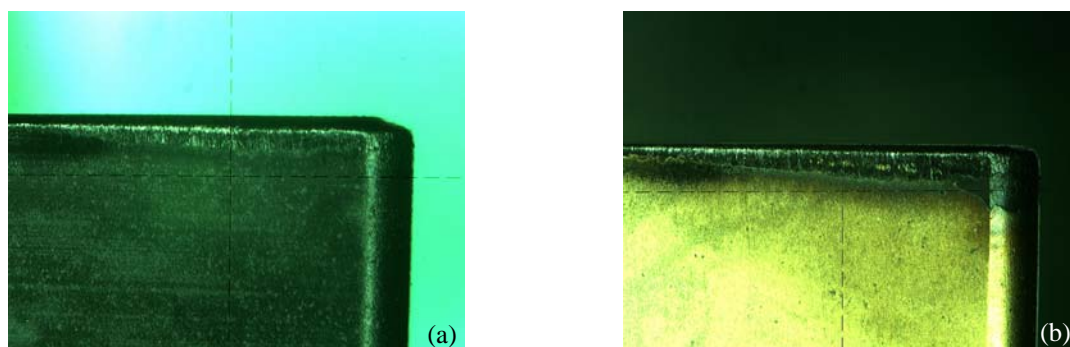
Tool flank wear in high speed turning of grey cast iron (a – tool A, b – tool B).
